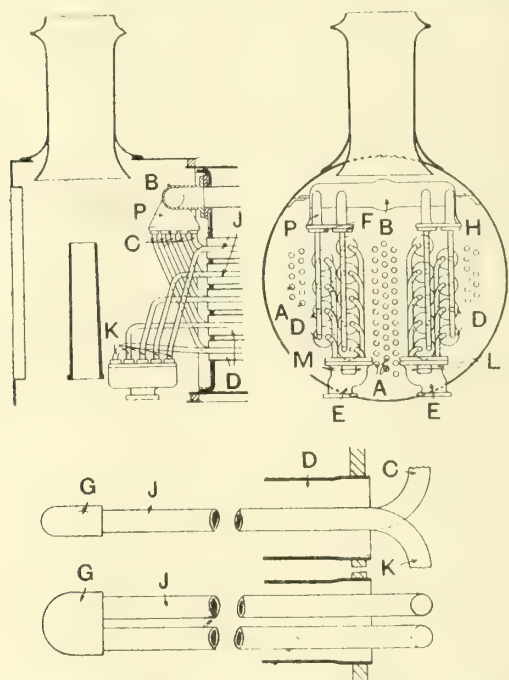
HUGHES' SUPERHEATER FOR LOCOMOTIVE BOILERS.
